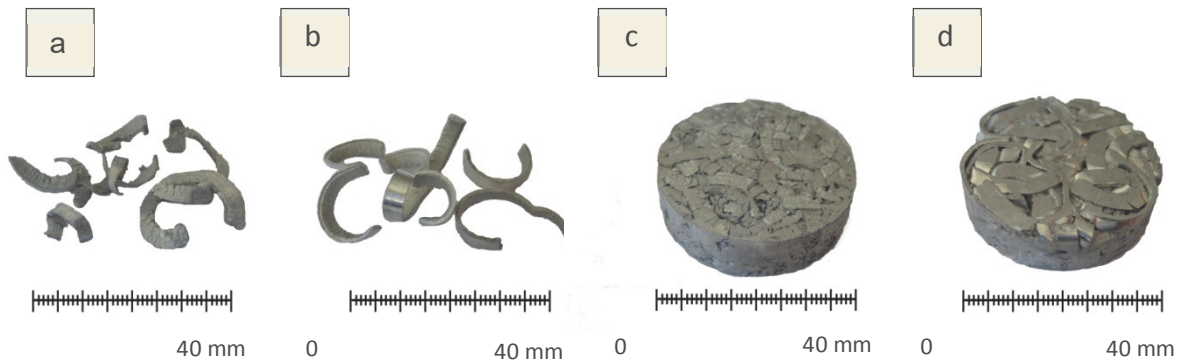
Macro-view of as machined chips from a) 413.0 and b) 6060 alloy. Cylindrical billets of as compressed: (c) 413.0 and d) 6060 alloy
